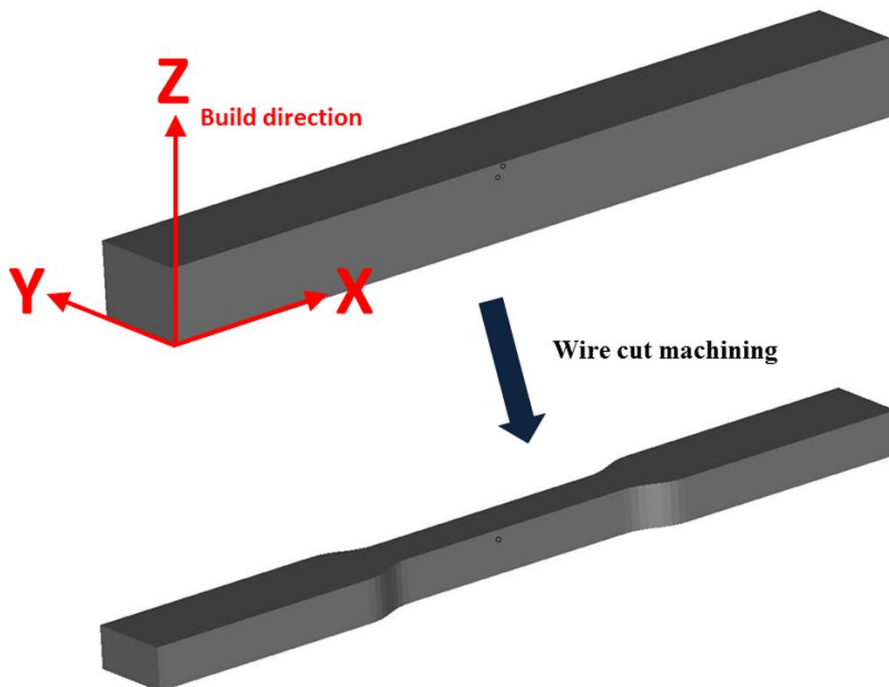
Schematic of producing tensile coupons from blocks fabricated by SLM
